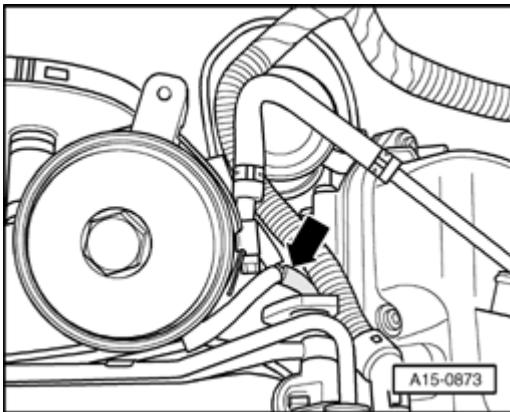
Disconnecting Vacuum Hose At T-Piece
